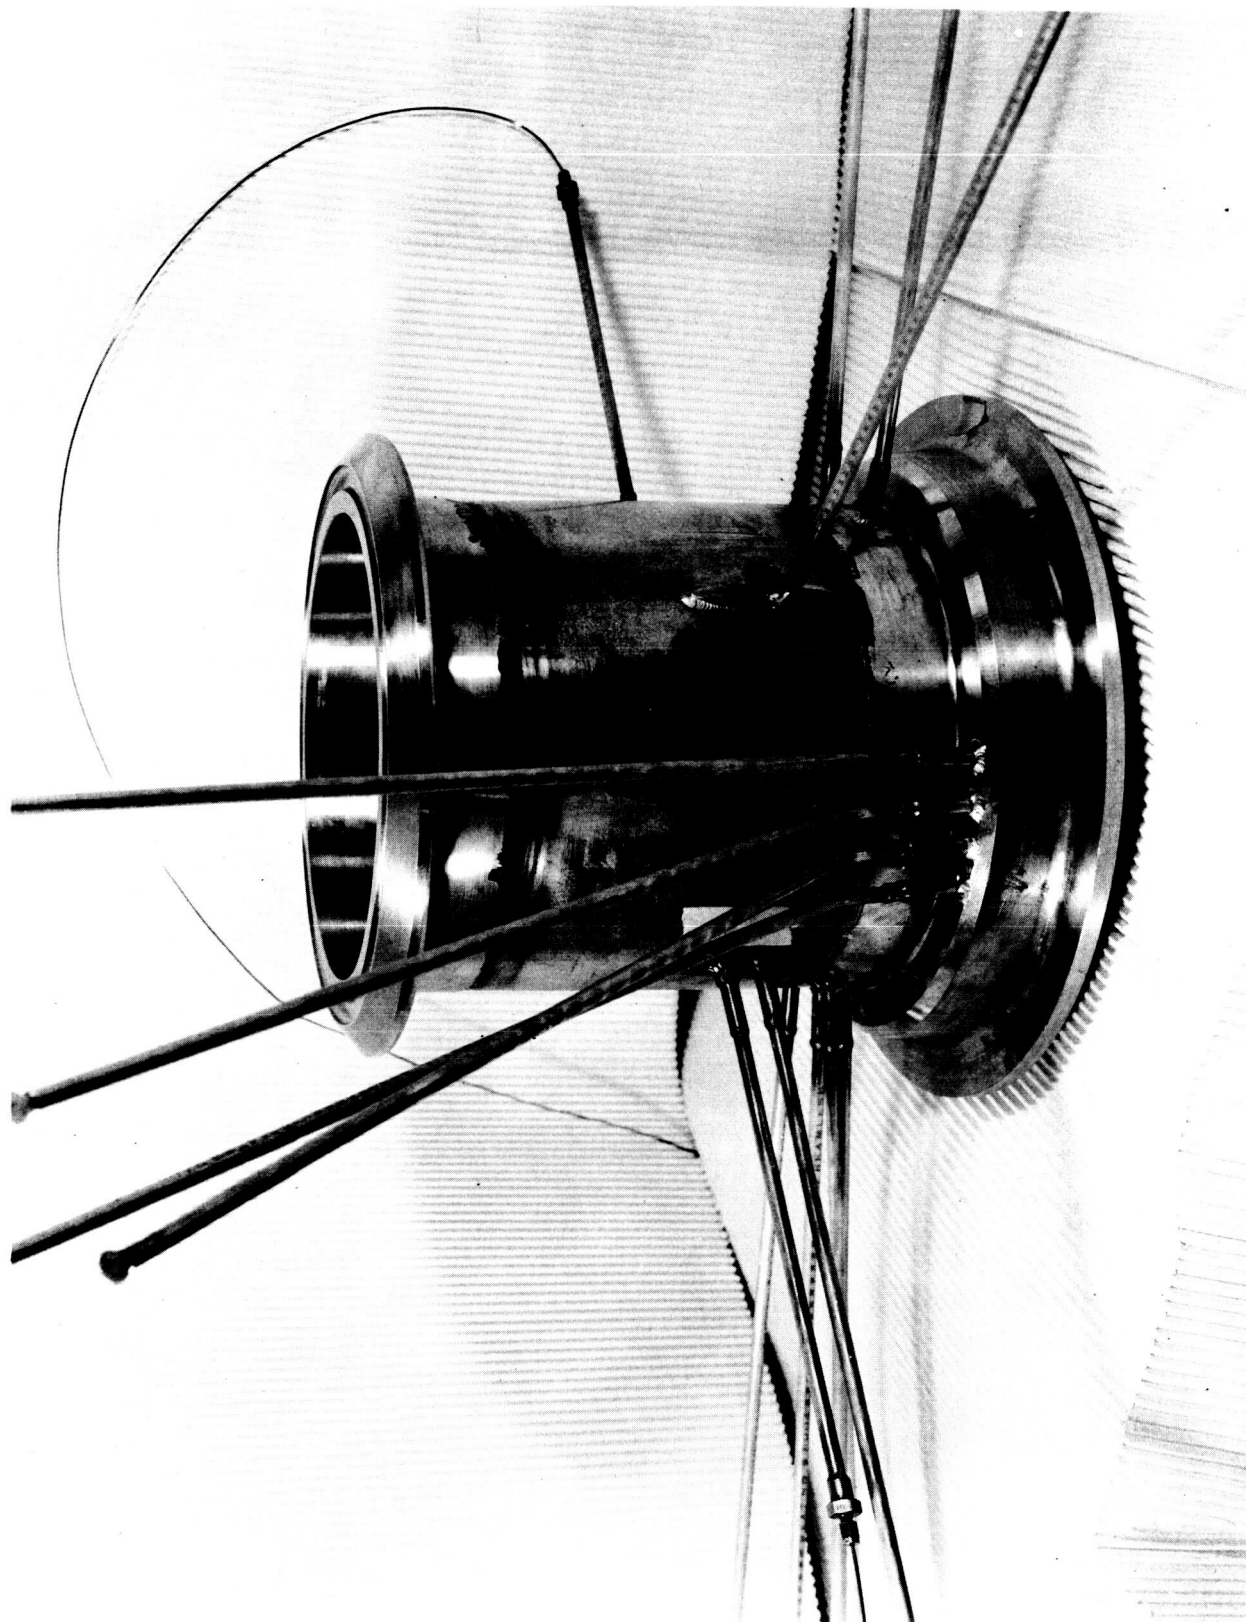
Turbine Inlet Duct with Machined Flanges and Welded Instrumentation Tubing.
